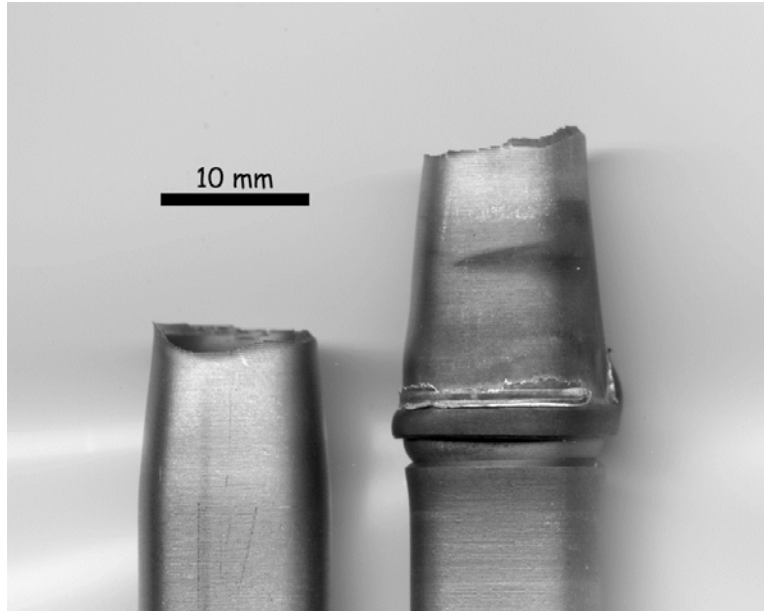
Pressure forge weld in PM2000 material, tensile tested at room temperature, failure away from weld at load of 7,942 pounds.
